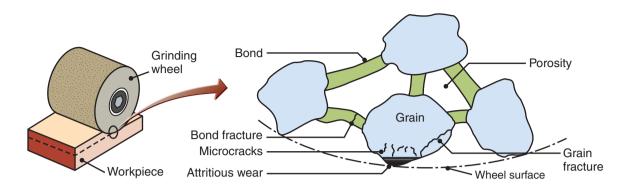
Schematic illustration of a physical model of a grinding wheel, showing its structure and its wear and fracture patterns.
